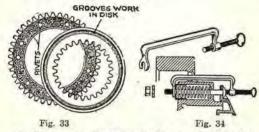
If worn, the facing should be renewed, and the rivets countersunk below the surface to prevent grooving the steel disks. The steel disks should be renewed if grooved or warped.
